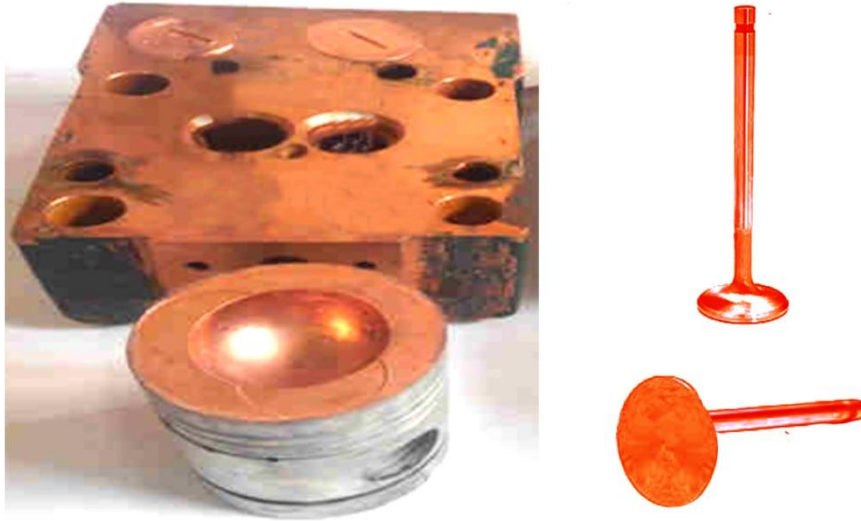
a Cylinder Head, piston and valve with copper coatings.
